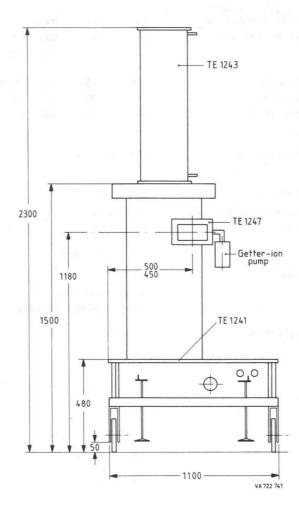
Complete assembly consisting of tube, trolley, oil tank, focus mount, r.f. transition and operational lead shieldings.
